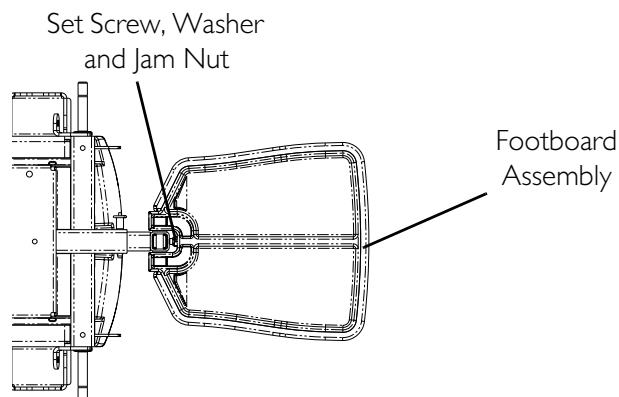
Adjusting the Footboard Assembly - Angle
